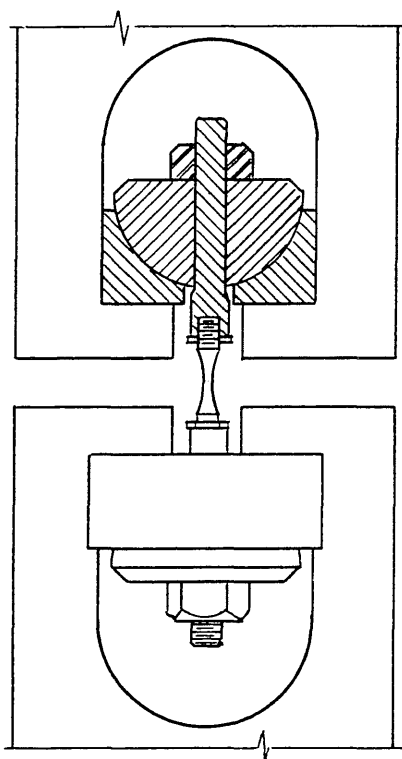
DETAILS OF FATIGUE SPECIMENS
